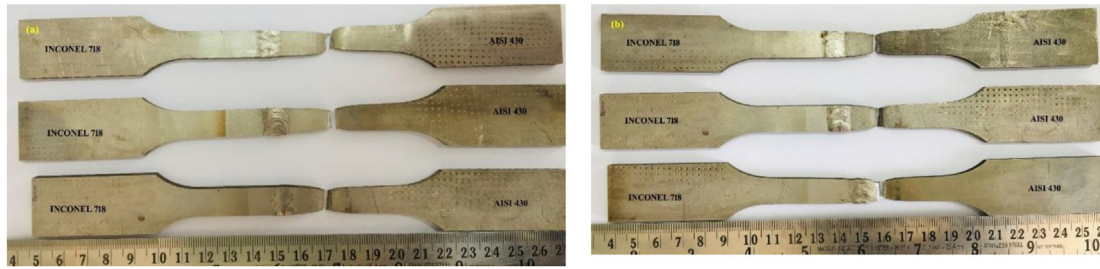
Tensile fracture under uni-axial loads of (a) PC-TIG and (b) CC-TIG weldments.
